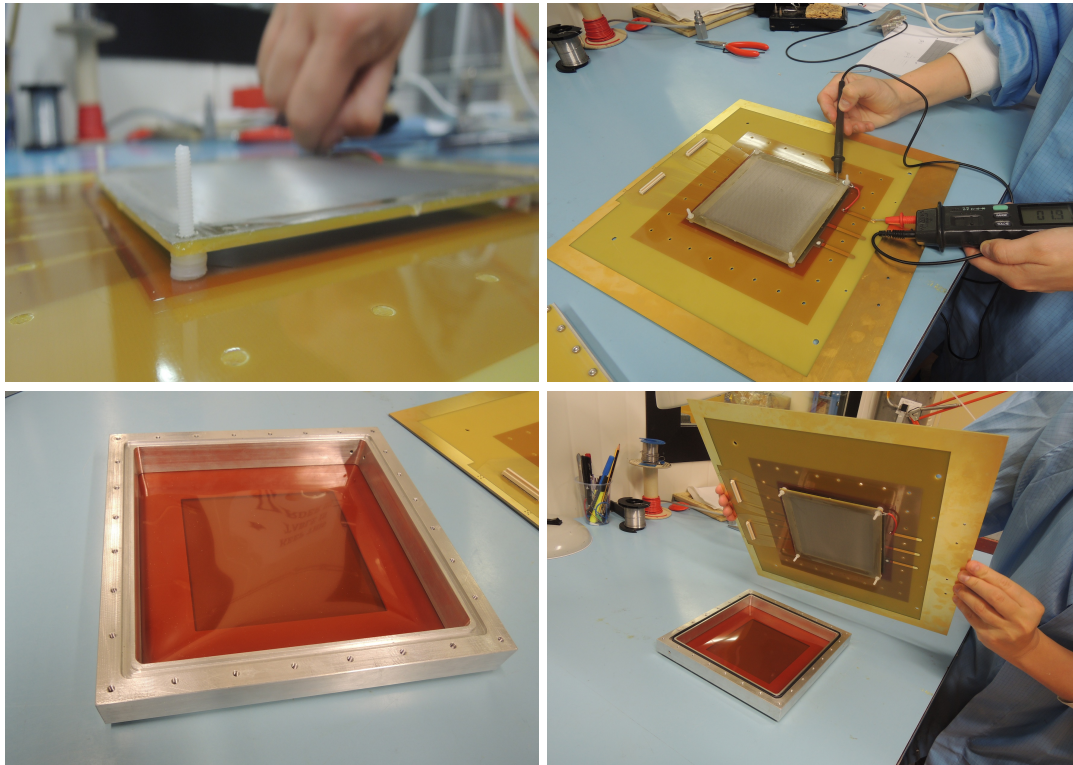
A bulk chamber is being assembled. All parts are cleaned with compressed air and ethanol before assembly. Top left: The drift electrode is mounted on spacers with a combined height of 5 mm. Top right: Electrical connections are checked. Bottom left: The frame to encapsulate the gas-volume. The groove is to position the gas-tightening O-ring. Bottom right: The chamber is being closed.
